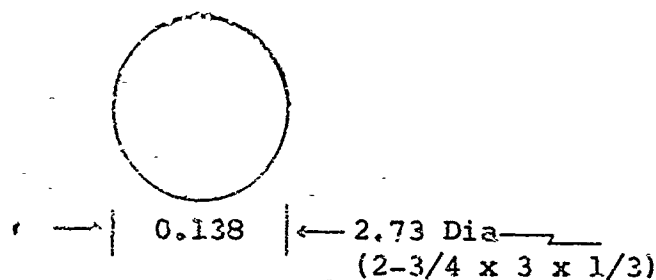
Dimensions of the 70 Shore A seal and cavity
